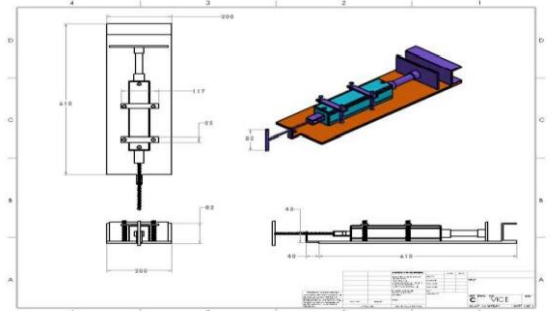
SolidWorks Drawing of the Clamping Mechanism
